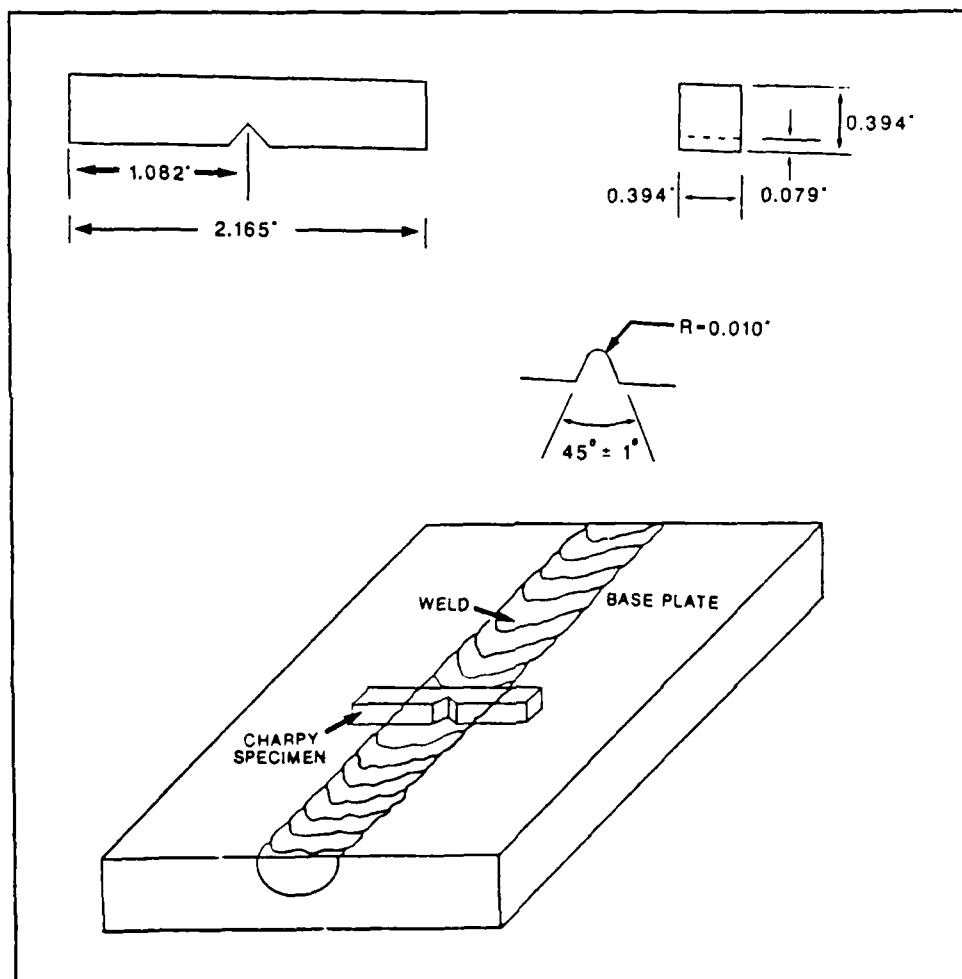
Full sized Charpy test specimens used in this investigation.
